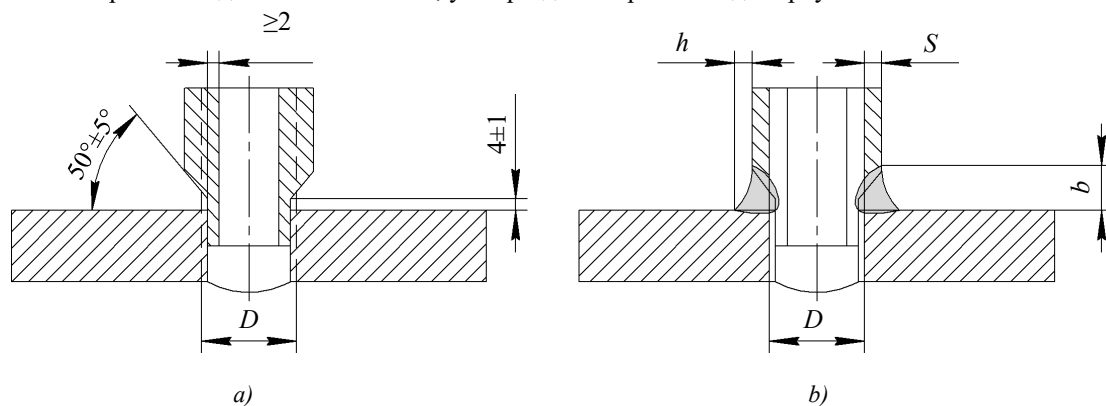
Fitting unit: a — before welding; b — after welding and removing the weld root
